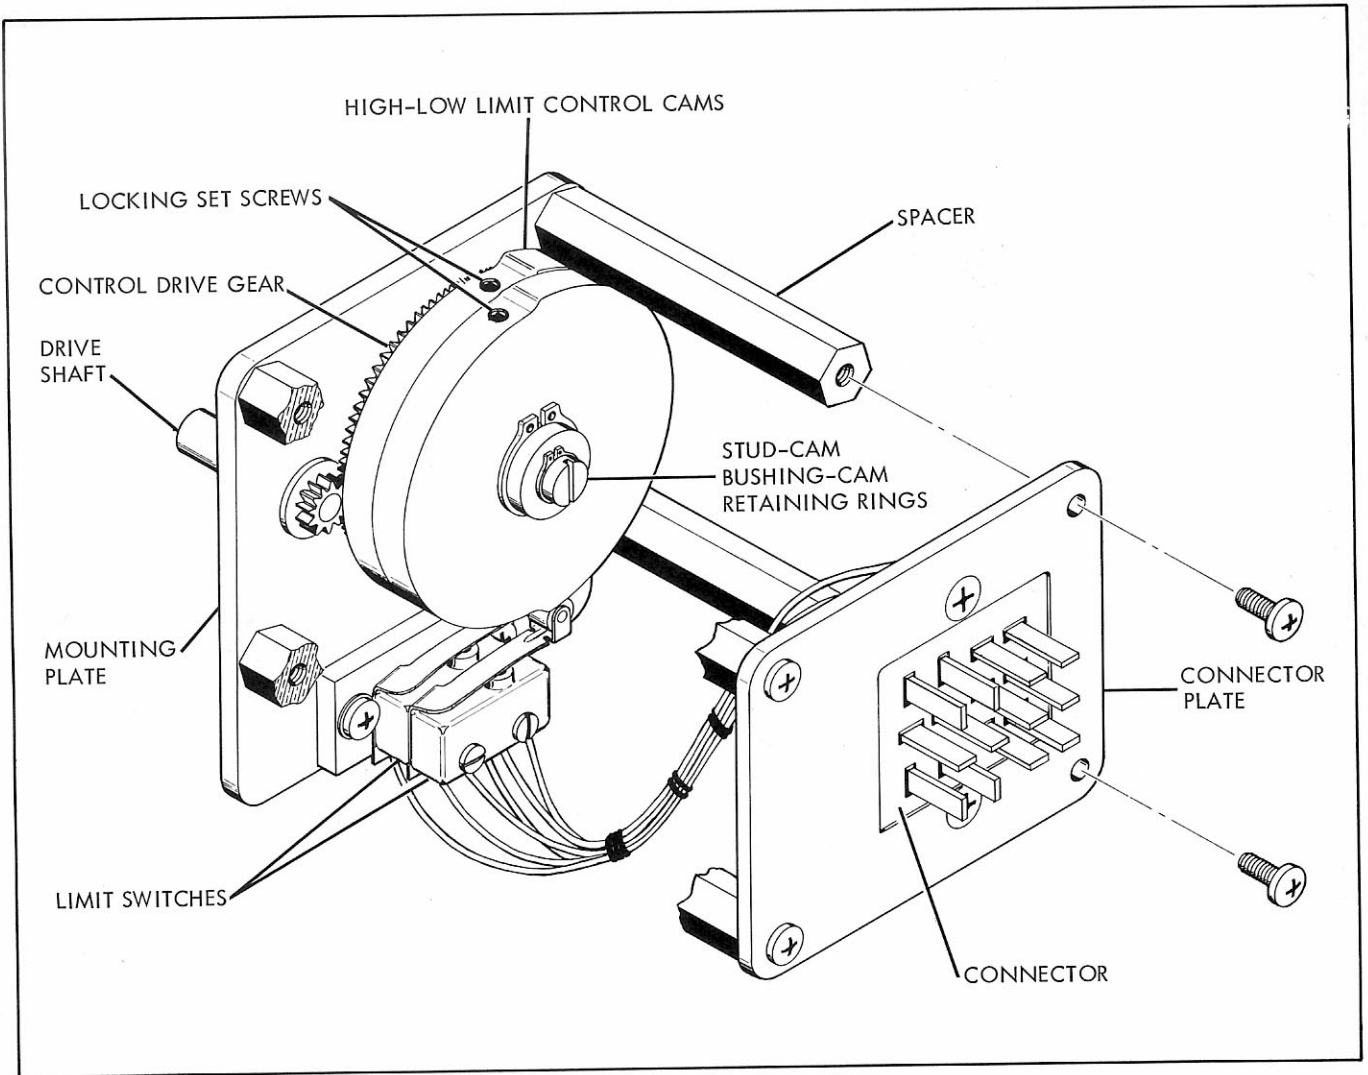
LIMIT SWITCH ASSEMBLY
